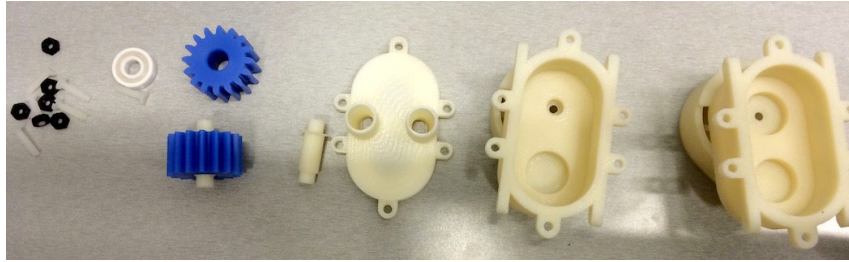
Fabricated external gear pump. Disassembled view of the gear pump unit, components from left to right: bearings, gears and shafts; lid with inlets/outlets to fish tail; main body with hole for motor shaft. The figure is adapted from Katzschmann et al. [2016].
